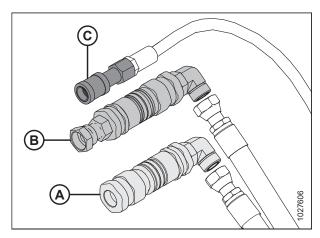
R113 SP Hose Bundle – Rotary Disc Ready Windrower
